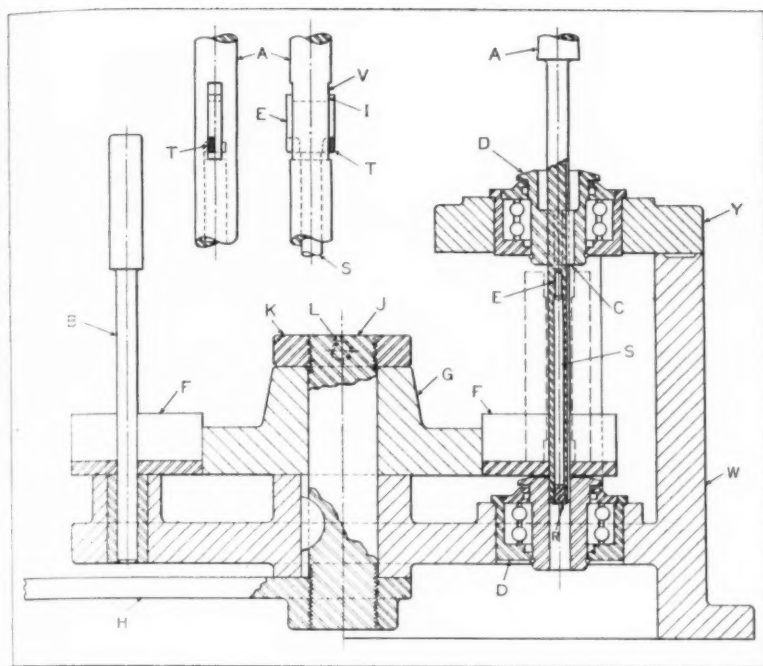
Cross-sectional View of Precision Boring Fixture Shown in Fig. 1
